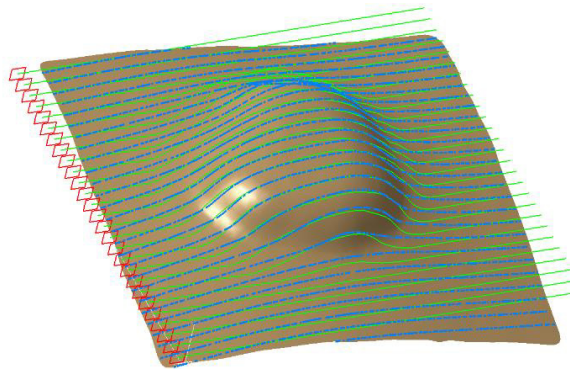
Superposition of the manufactured (blue lines) and designed (green lines) parts.
